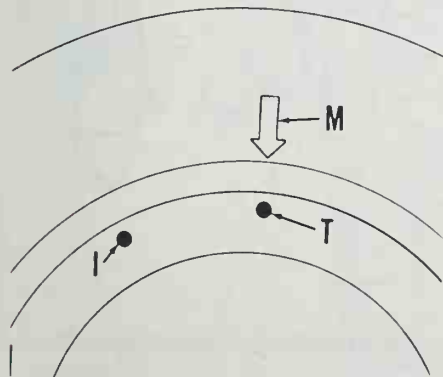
Drawing of crankshaft pulley timing marks used on some models.
